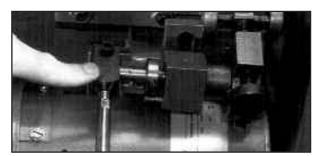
Adjusting Lathe Belt Tension - Shown in the down position
